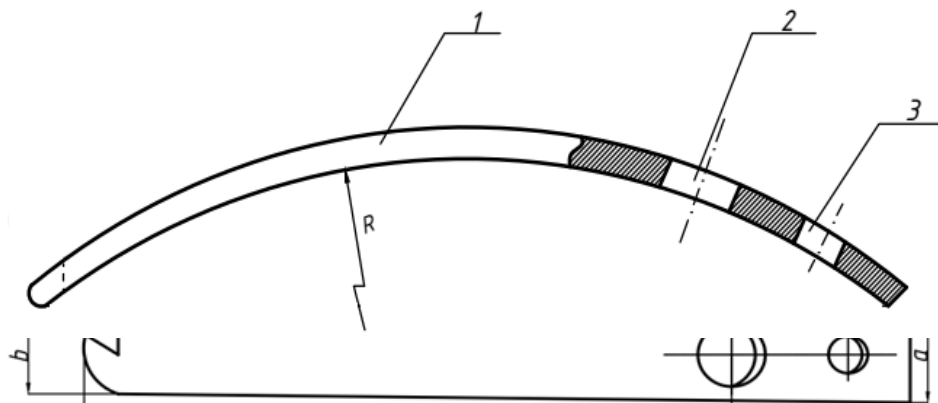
Shuttle thread tension regulator of the bobbin threader.
